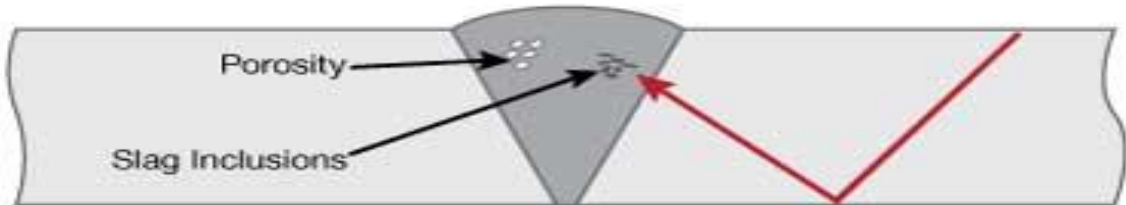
(d) Porosity and slag inclusions in weld [8]
